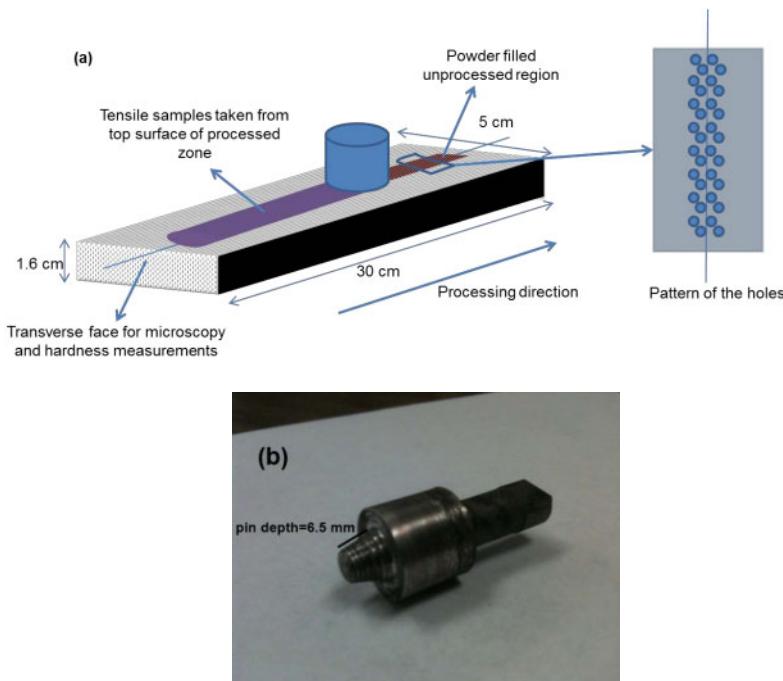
(a) Schematic showing the FSP process, plate dimensions, pattern of the drilled holes, location of samples for characterization and (b) the tool used for processing.
